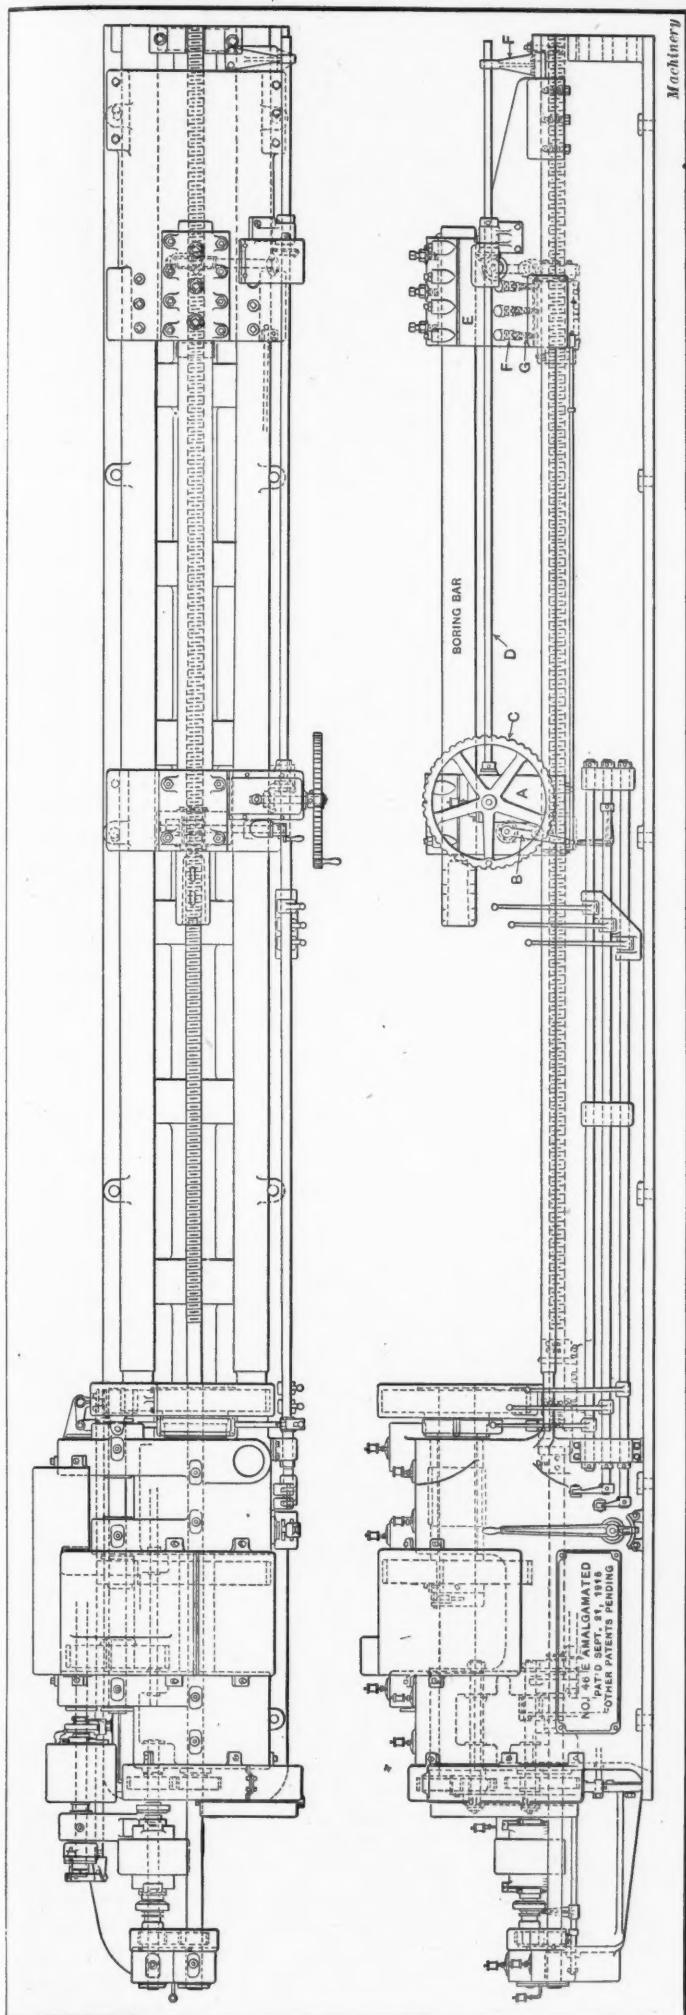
Front and Plan Views of the No. 46 E Amalgamated Shell Boring Lathe shown in Fig. 2. This Illustration shows Many of the Features of this Machine more clearly
